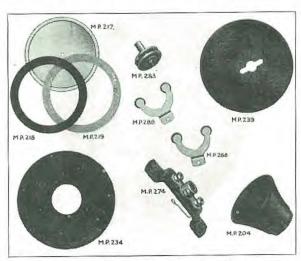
Transmitter Disassembled Giving Code Number of Parts
